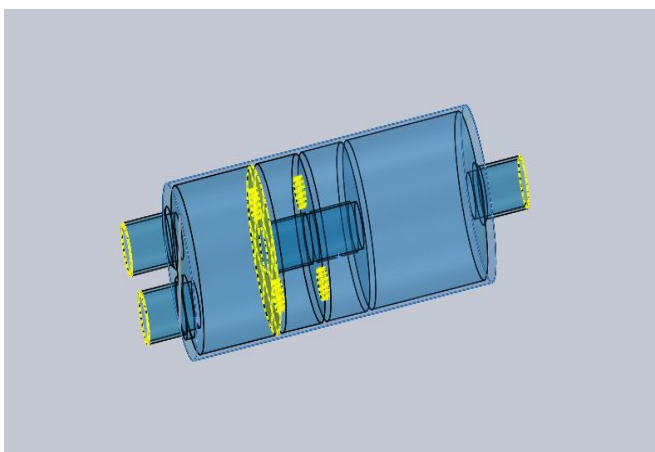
Isometric view of circular cross sectional muffler with dual outlet
